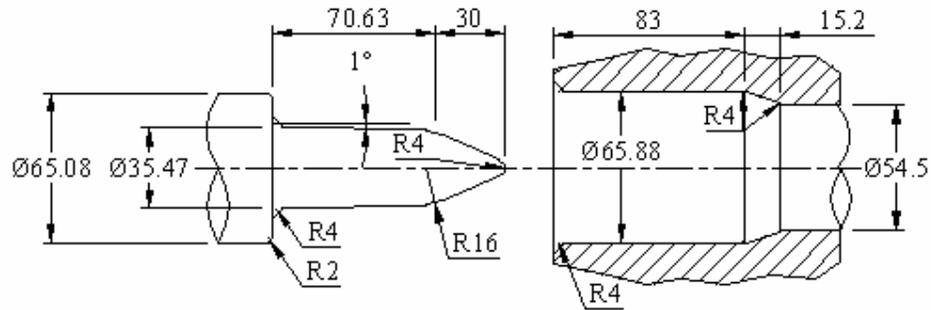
Header tool and gripper die of 2nd stage [3]
